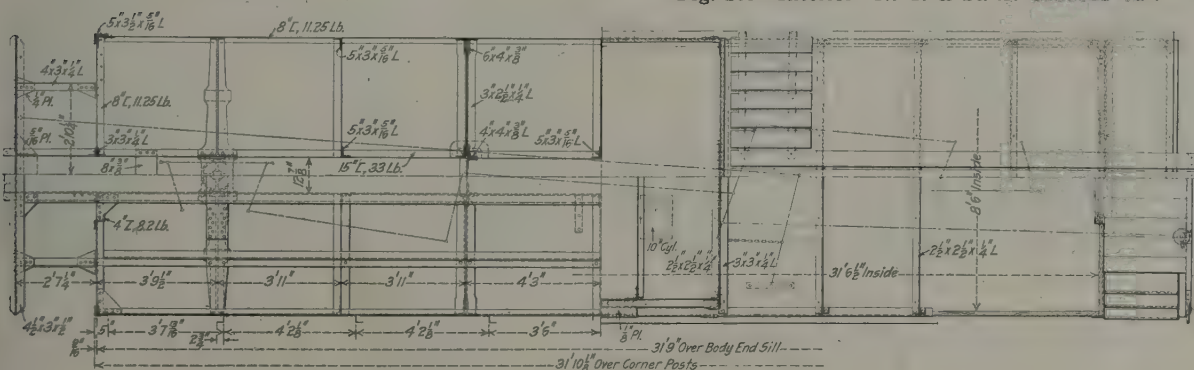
Plan of Caboose Car Shown in Figs. 261-266.
